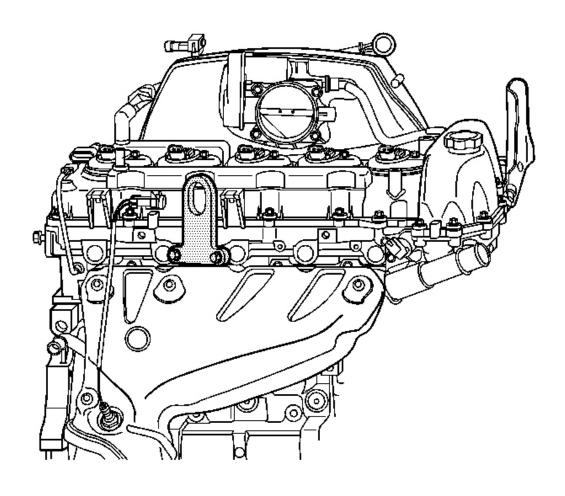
Identifying J 44220 Courtesy of GENERAL MOTORS CORP.
